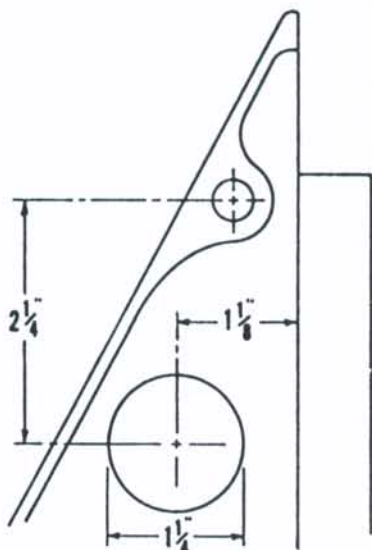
To cure vapor lock on models K399-2 and K440-2, cut hole in end plate to dimensions shown above as outlined in text.
